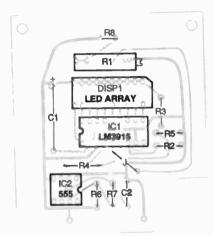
Parts location diagram shows that the PC board is uncluttered and easy to assemble. Mounting holes align with the screws used to close the plastic case.
